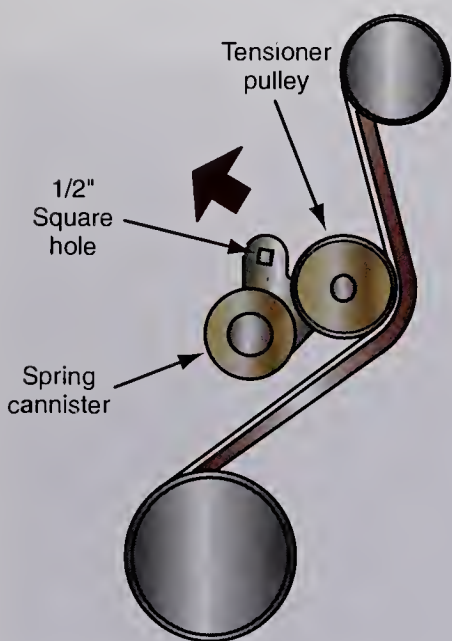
One-half inch drive opening in the tensioner pulley.
